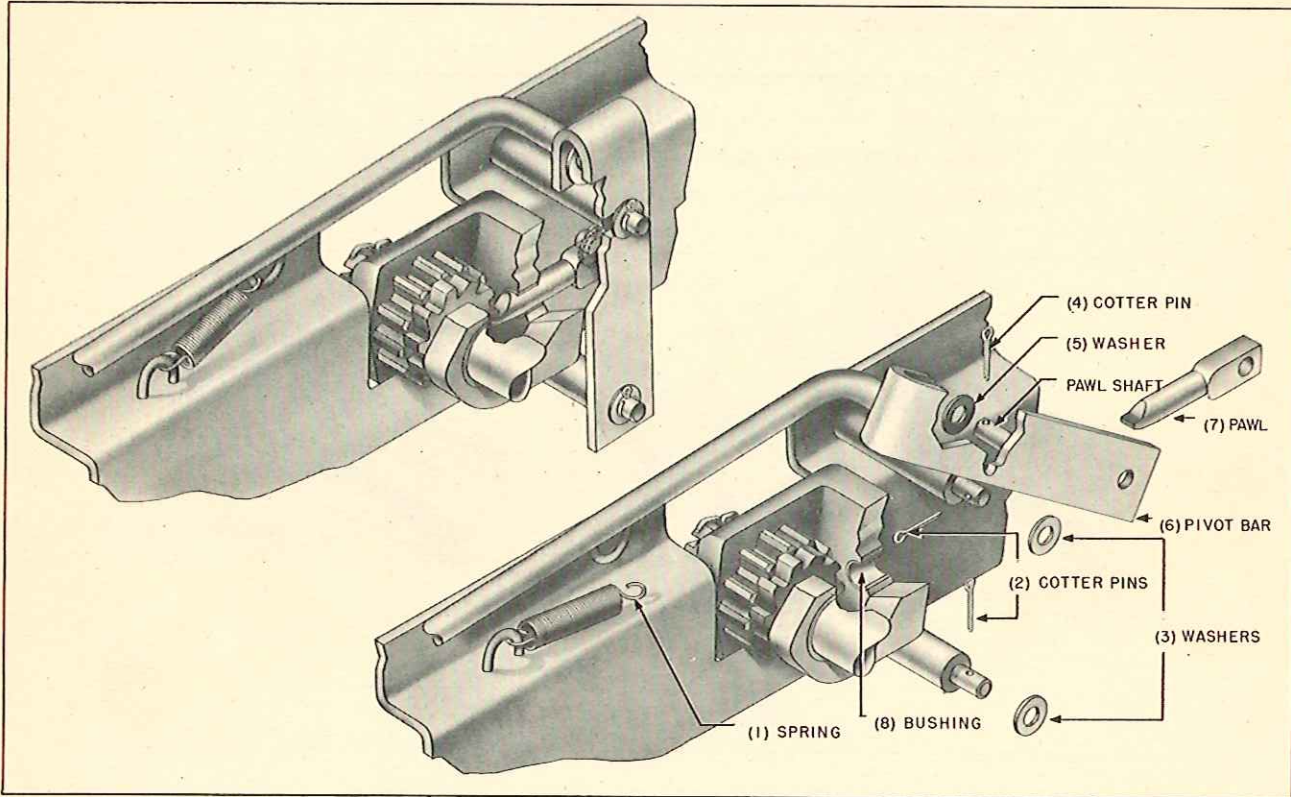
Pawl, assembly and exploded views, TLD-3 (ms) door.
